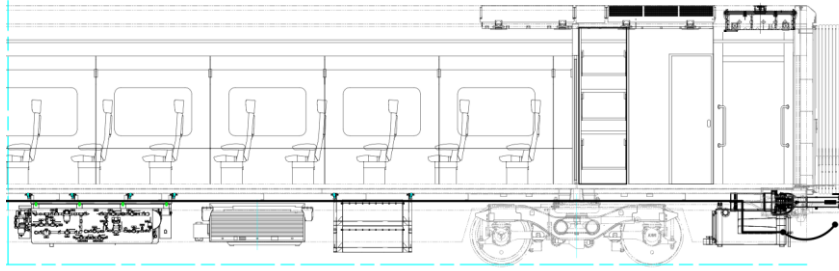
Pneumatic Piping Diagram Design on Motor Engine Combustion (side view)
